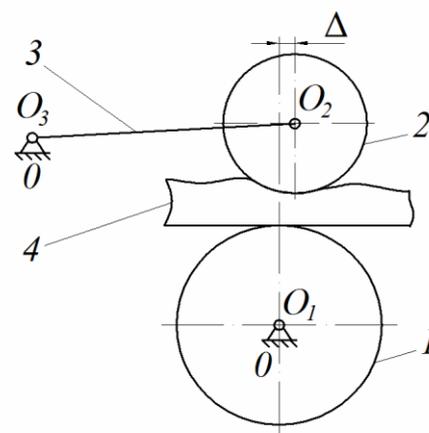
Scheme of rolling pair with the center of movable working shaft displaced along the arc of circle: 1 – rotating working shaft; 2 – movable working shaft; 3 – lever; 4 – processed material; O_1, O_2, O_3 – axes of rotation
